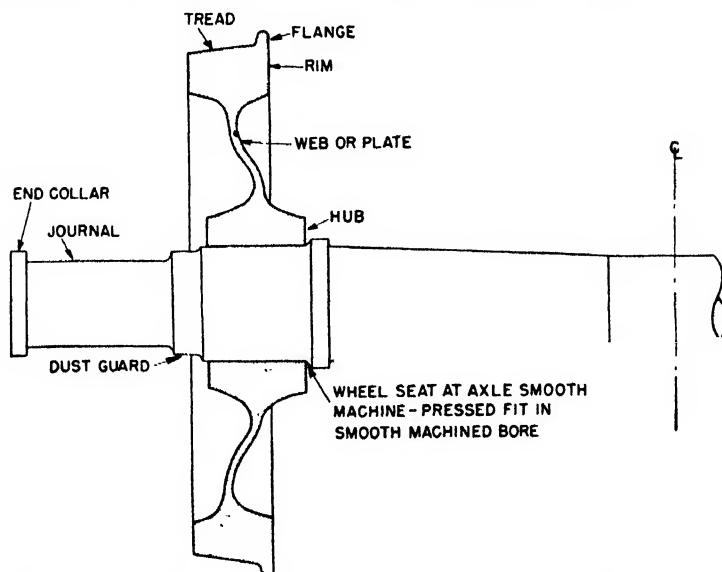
1. Sketch showing cross-section of a wrought-steel railroad wheel mounted on an axle, giving nomenclature of the principal parts of each.
